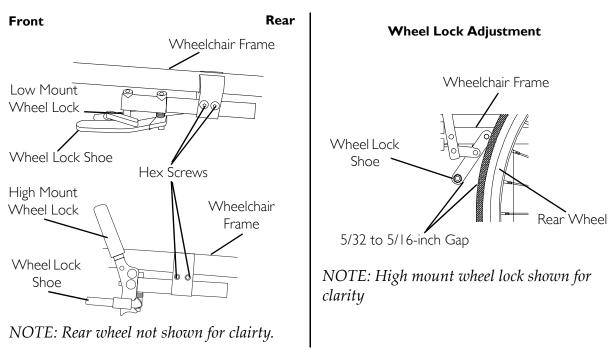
Wheel Lock Adjustment/Replacement
